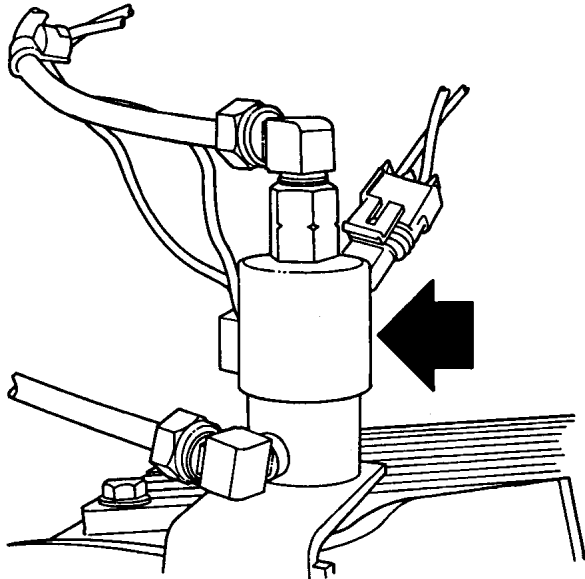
Typical Solenoid Valve (Fan Drive or Radiator Shutter)
